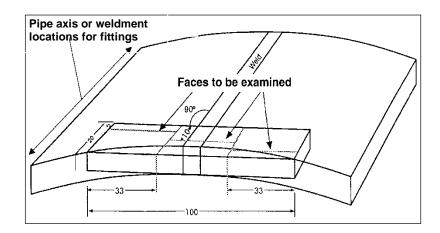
Weld Area of Longitudinally Welded Pipe or Welded Fittings (All Dimensions in mm [1 in = 25.4 mm])
